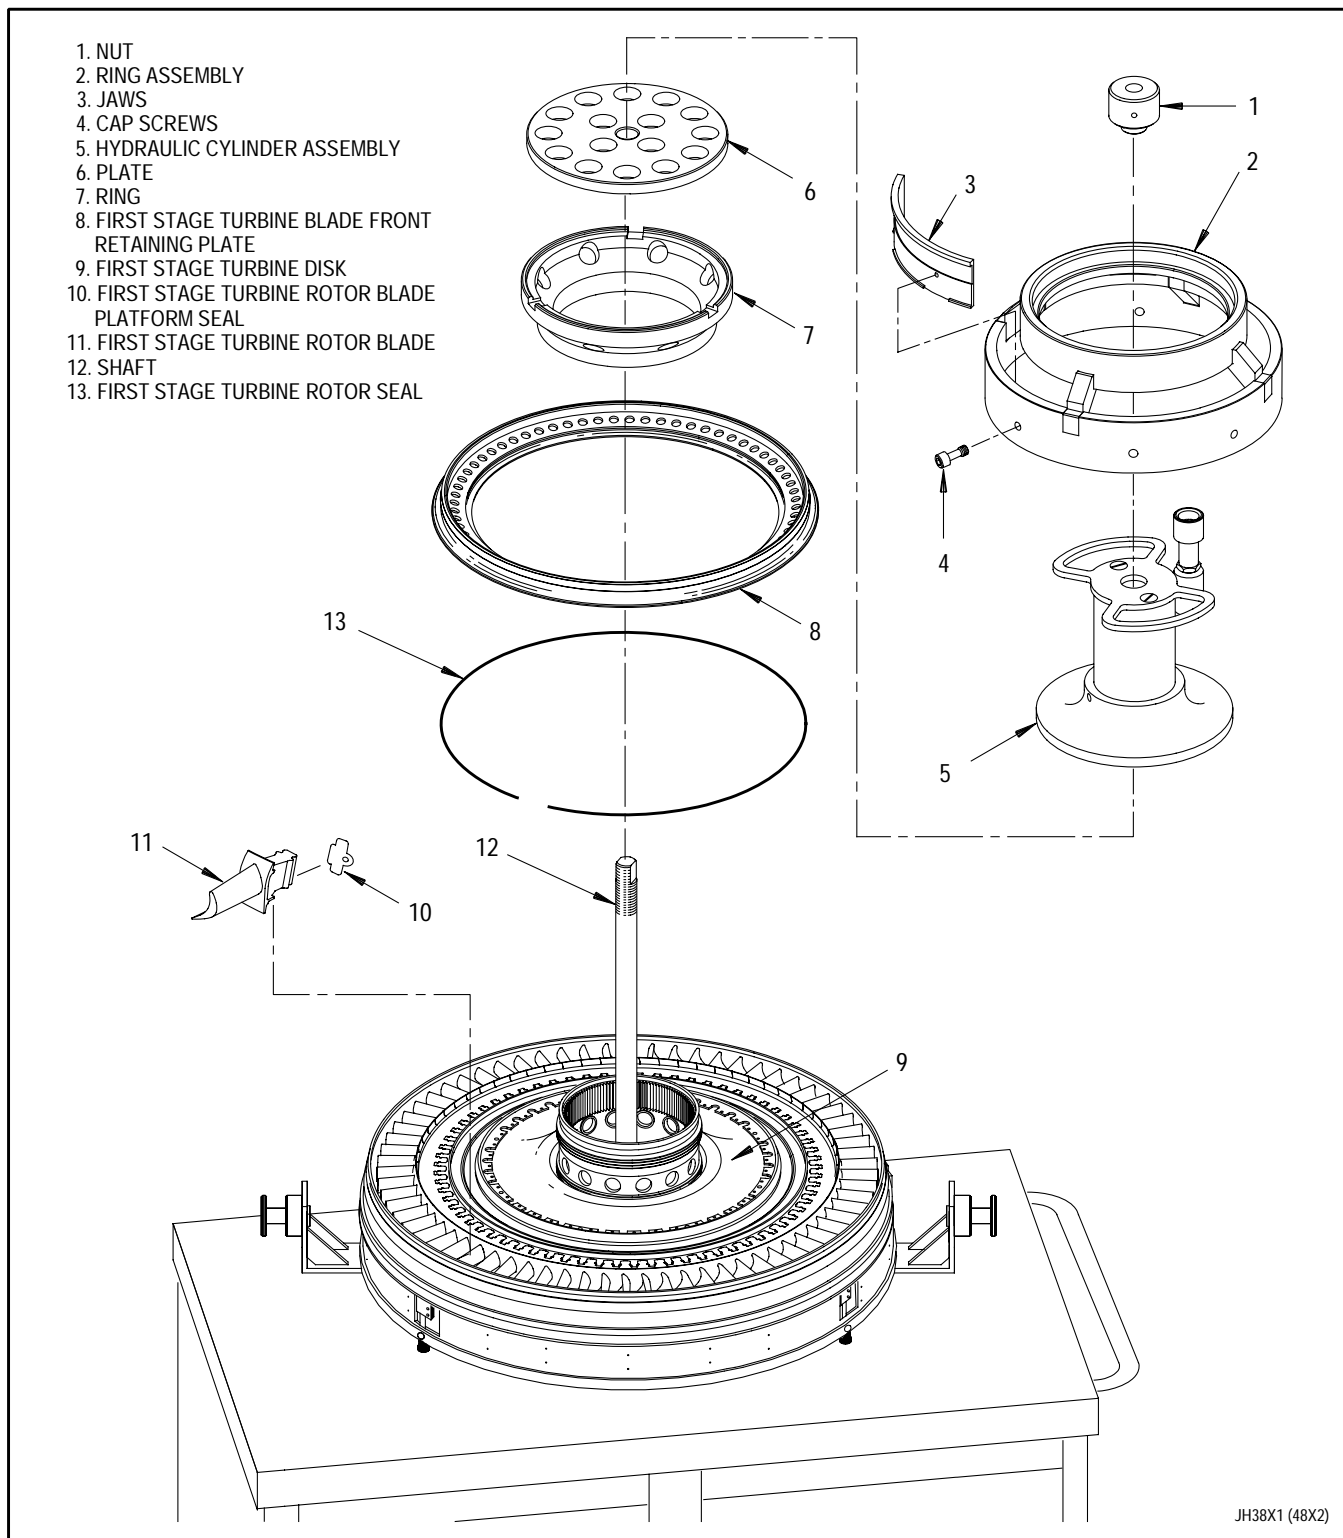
First Stage Turbine Blade Front Retaining Plate and First Stage Turbine Rotor Blades - Removal
